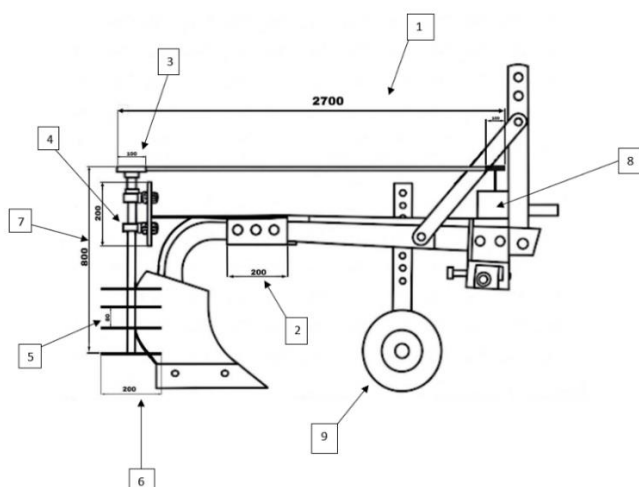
diagram of the Moldboard Plow (1) Movement drive belt (2) Hitch area to plow frame (3) Bearing diameter (4) Mounting of the tool shaft to the frame (5) Spacing between blades (6) Tool length (7) Tool support shaft) 8) Power transmission unit (9) Depth control wheel
